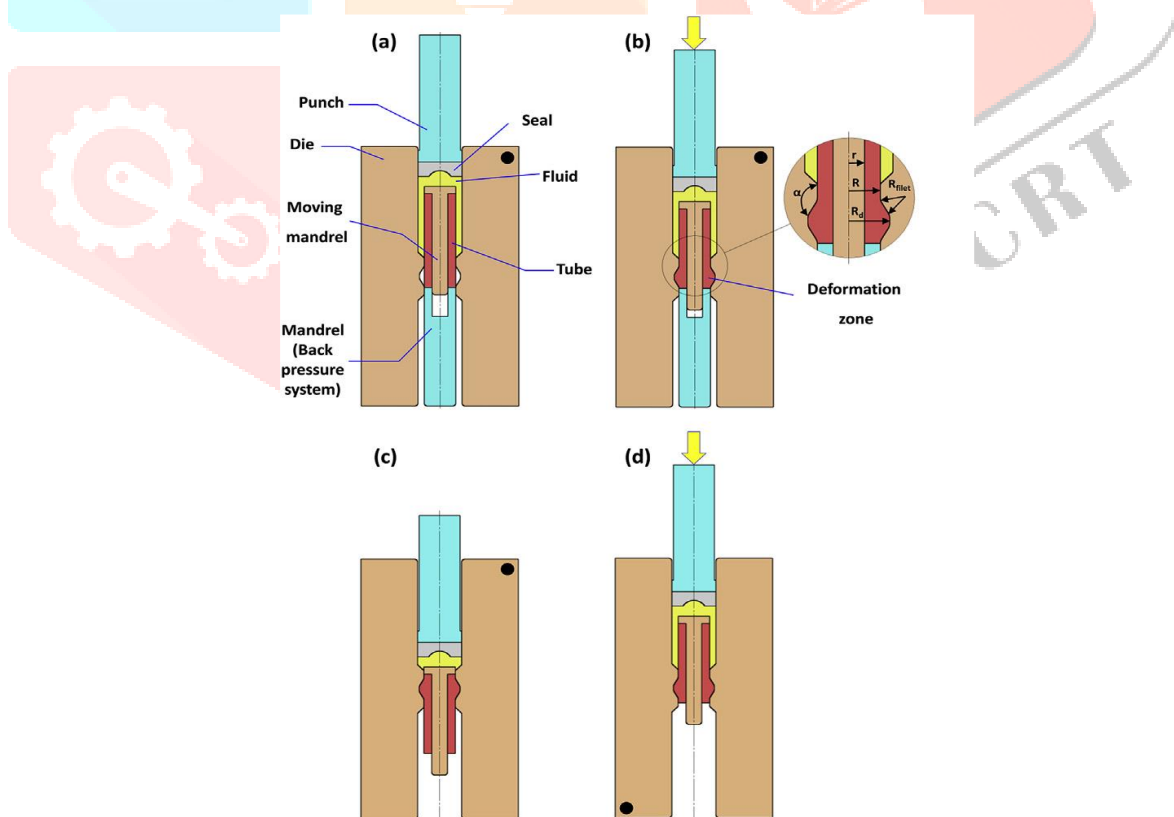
Hydrostatic tube cyclic expansion extrusion (HTCEE) [47]
